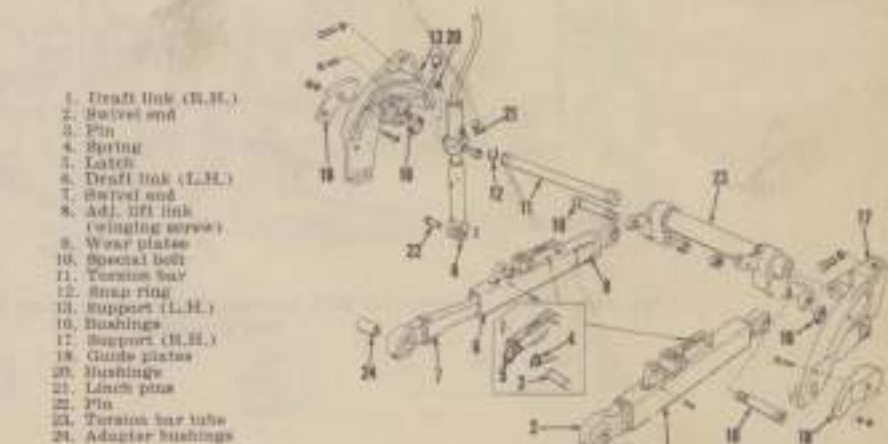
Exploded view of three point hitch draft links and torsion bar unit. Wear plates (9) on draft links (1 & 4) are renewable. Side sway of draft links is controlled by renewable guide plates (18 & 19) attached to torsion bar supports (13 & 17). Bushings (24) are used to convert the Category II hitch to use Category I implements.
